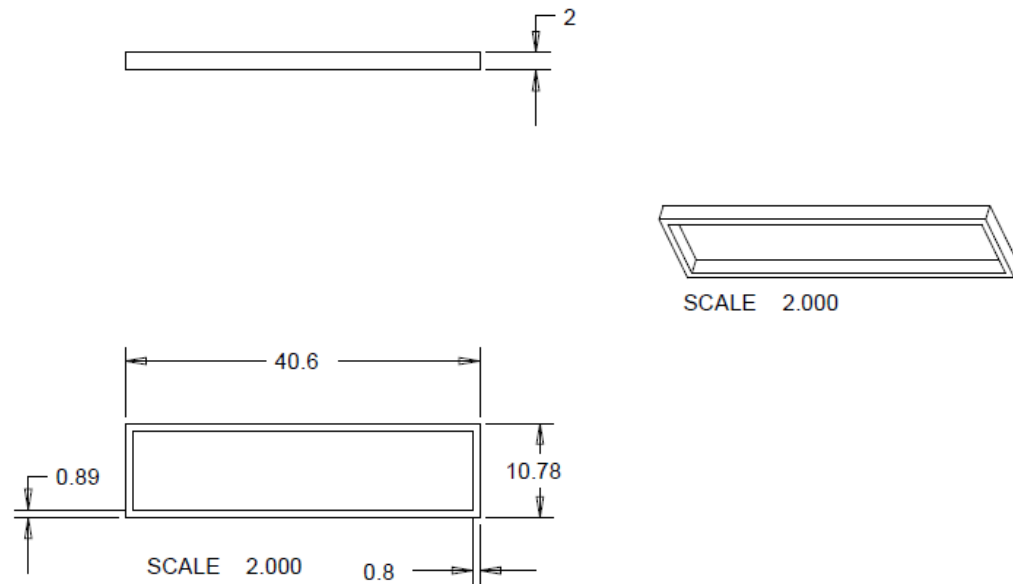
Engineering drawings of the gasket. All dimensions are in millimeters.
